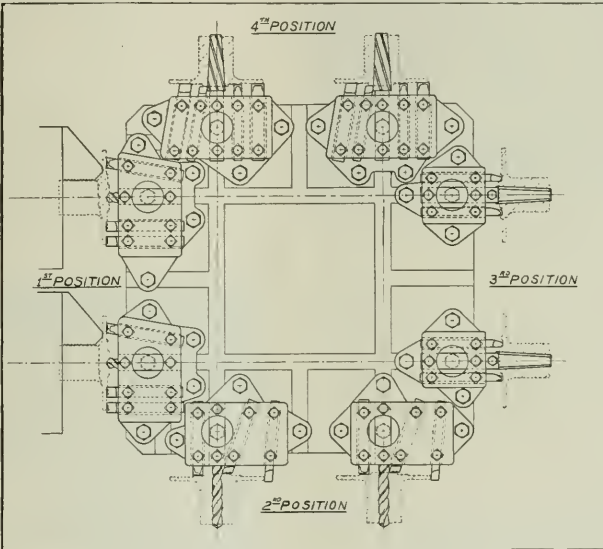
Tooling Equipment used on a Double-spindle Flat Turret Lathe for machining an Automobile Rear Hub
